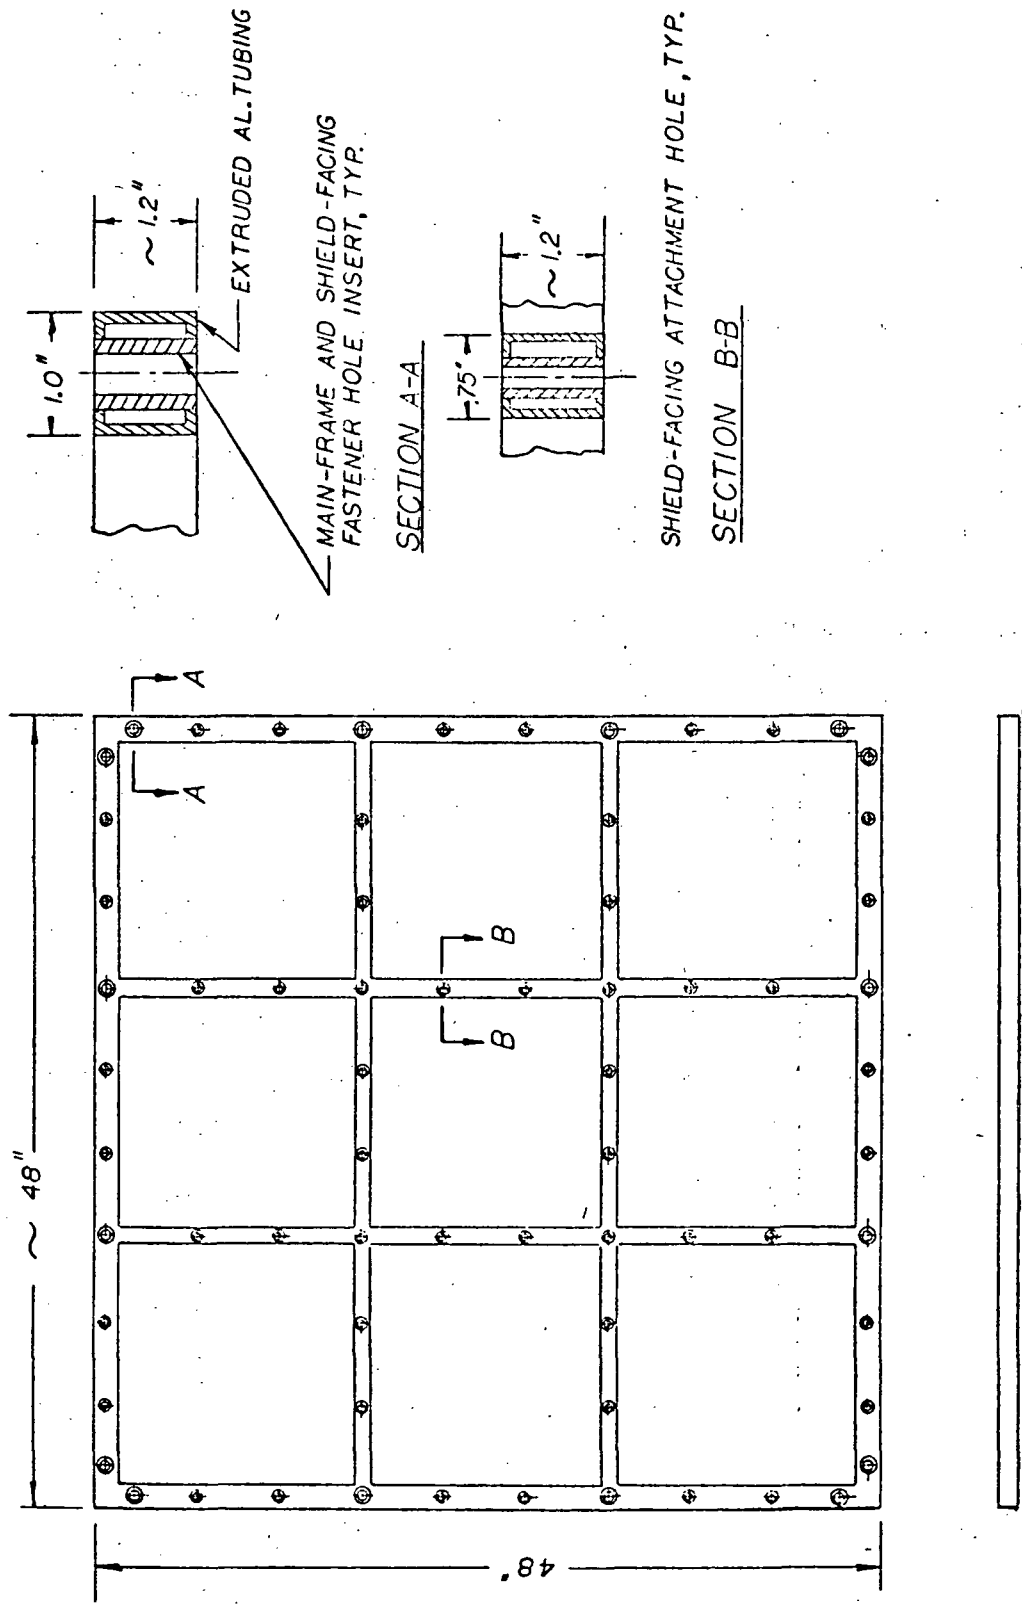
, DETECTOR SUBASSEMBLY FRAME (WELDED CONSTRUCTION)
